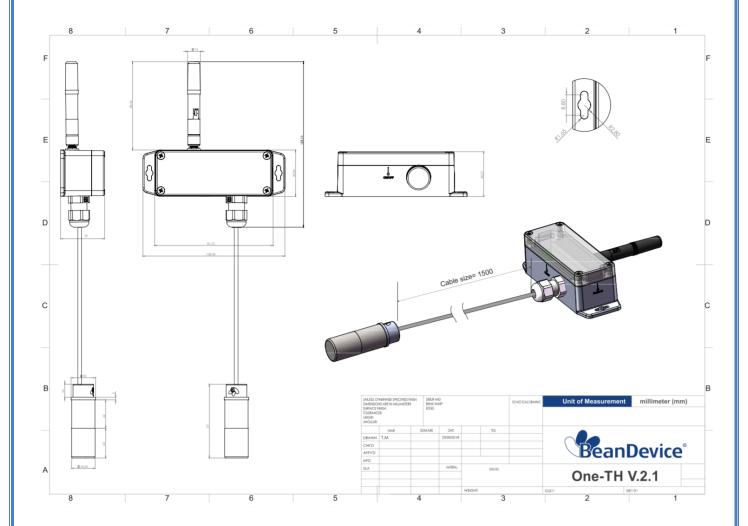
BeanDevice® ONE-TIR Mechanical drawing
